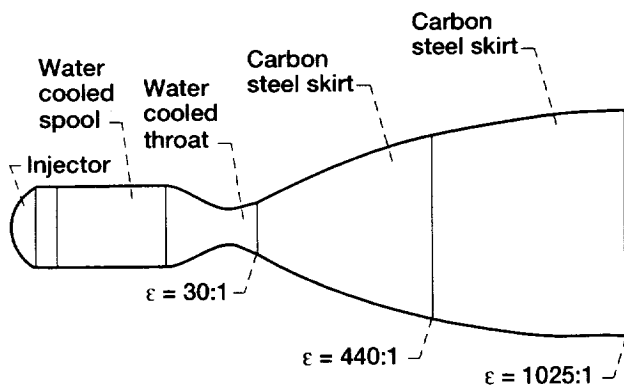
Thruster assembly showing components and expansion area ratios, ϵ .
